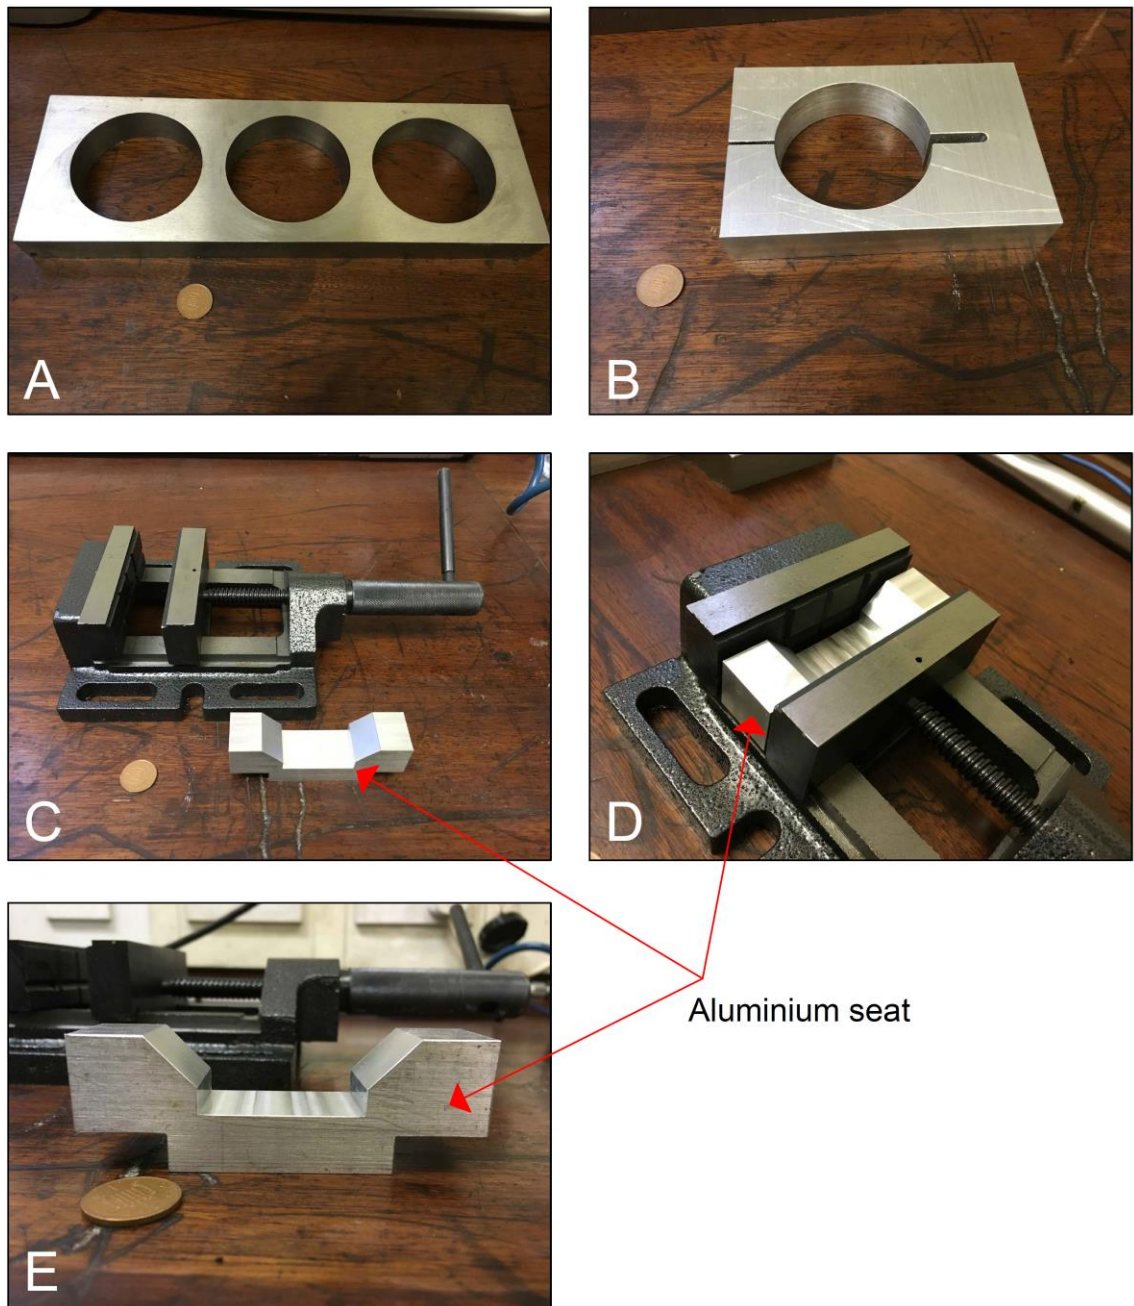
(A) Grinding jig for grinding three 76 mm diameter samples to 30mm thickness, (B) cutting jig for cutting 76 mm diameter disks in half, (C, D and E) machine vice and aluminium seat for semi-circular disk to sit on for grinding the bottom edge flat and grind out notch. Each one of these jigs and fixtures was designed and manufactured specifically for this project by Neil Hughes (UCL). One pence piece for scale.
